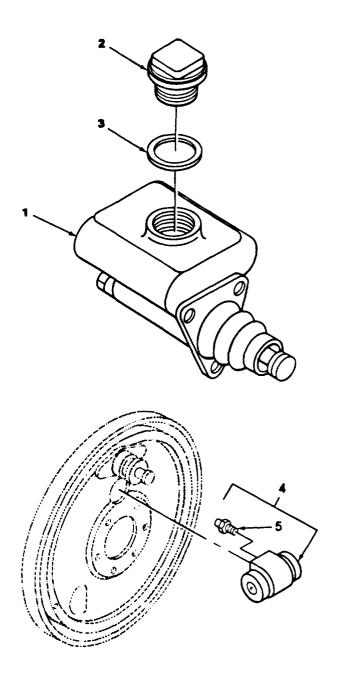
HYDRAULIC MASTER CYLINDER AND WHEEL CYLINDER.
